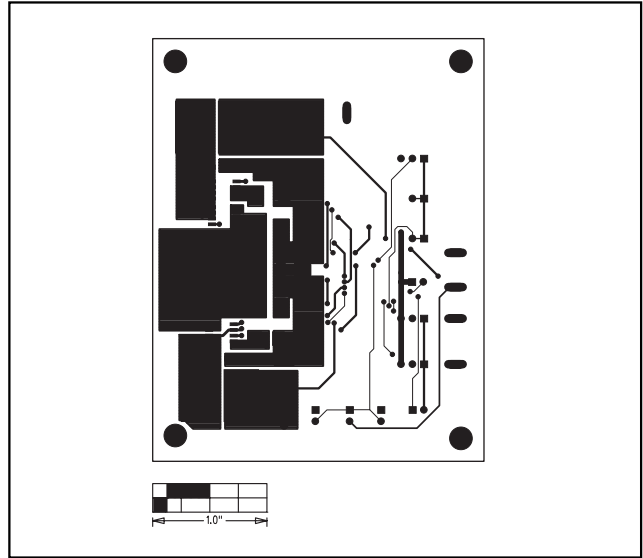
MAX1845 EV Kit PC Board Layout—Component Side
